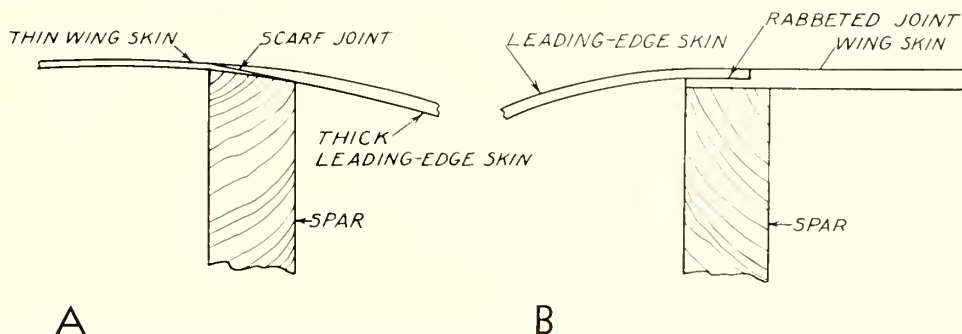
Two methods of forming joints between skins of unequal thickness. *A*, scarf joint in which the length of scarf is equal on both skins. *B*, modified butt joint in which the thicker plywood is rabbeted to receive the thinner skin.
